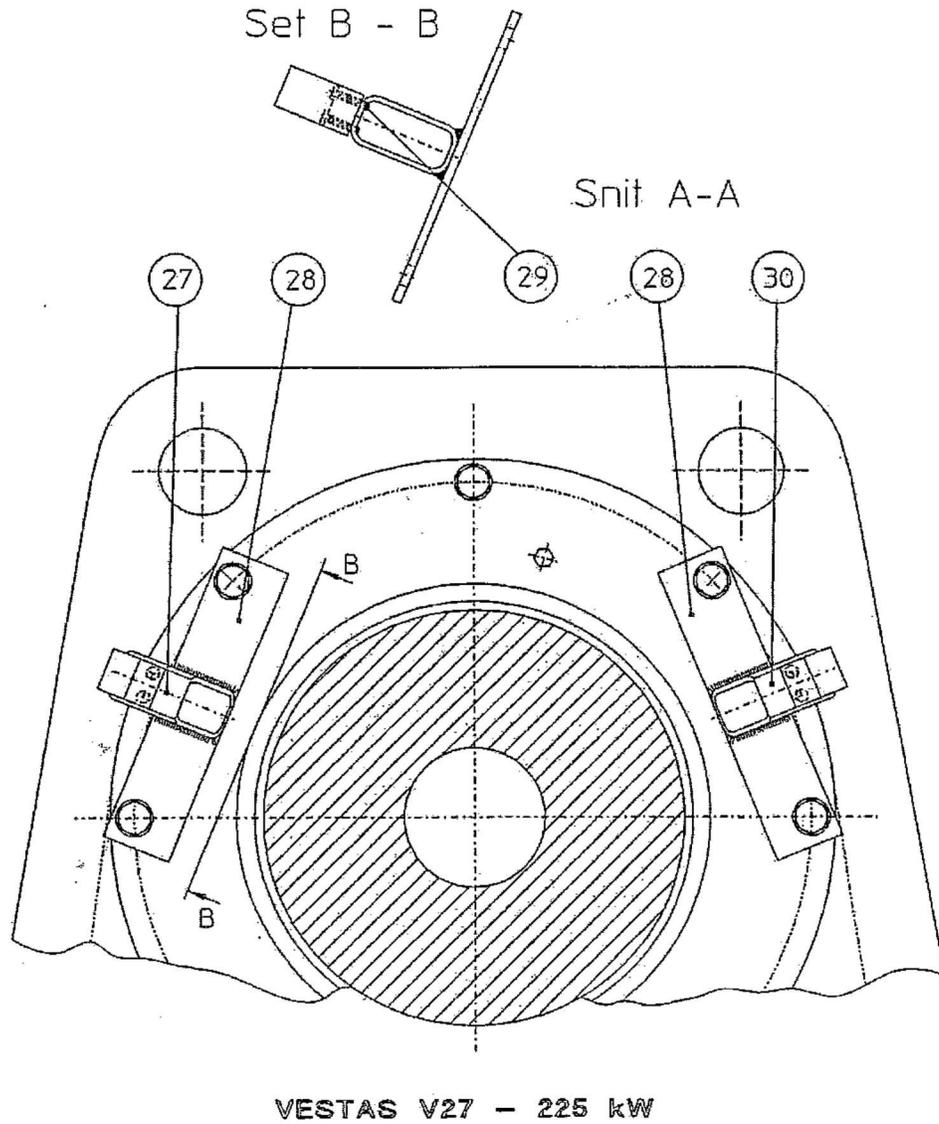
Spare parts drawing, main shaft assembly, V27, rear bearing and shrink disk
